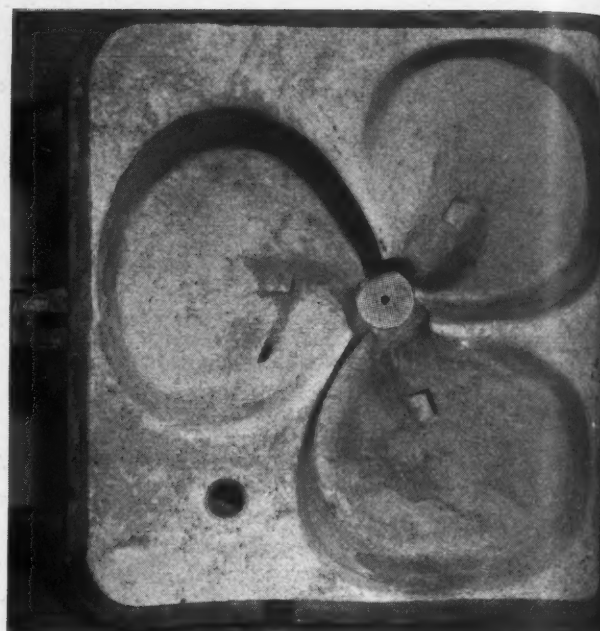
Mold for 24-in. manganese bronze propeller. Inside surface, cope side, showing location of screen.
